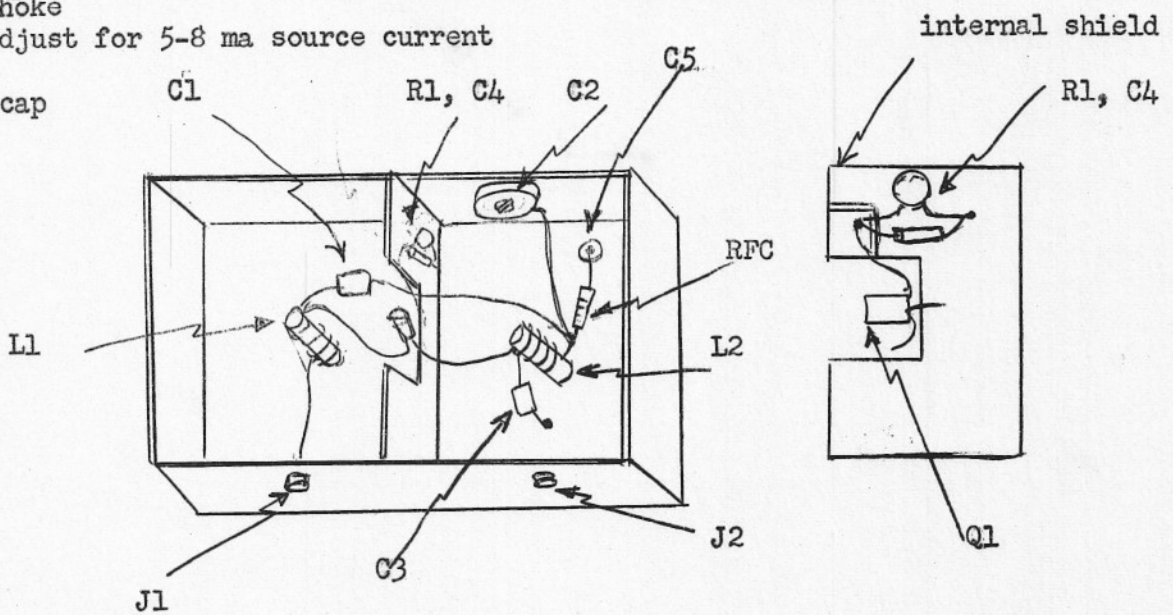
a & b Physical layout of parts, showing partially etched internal shield
